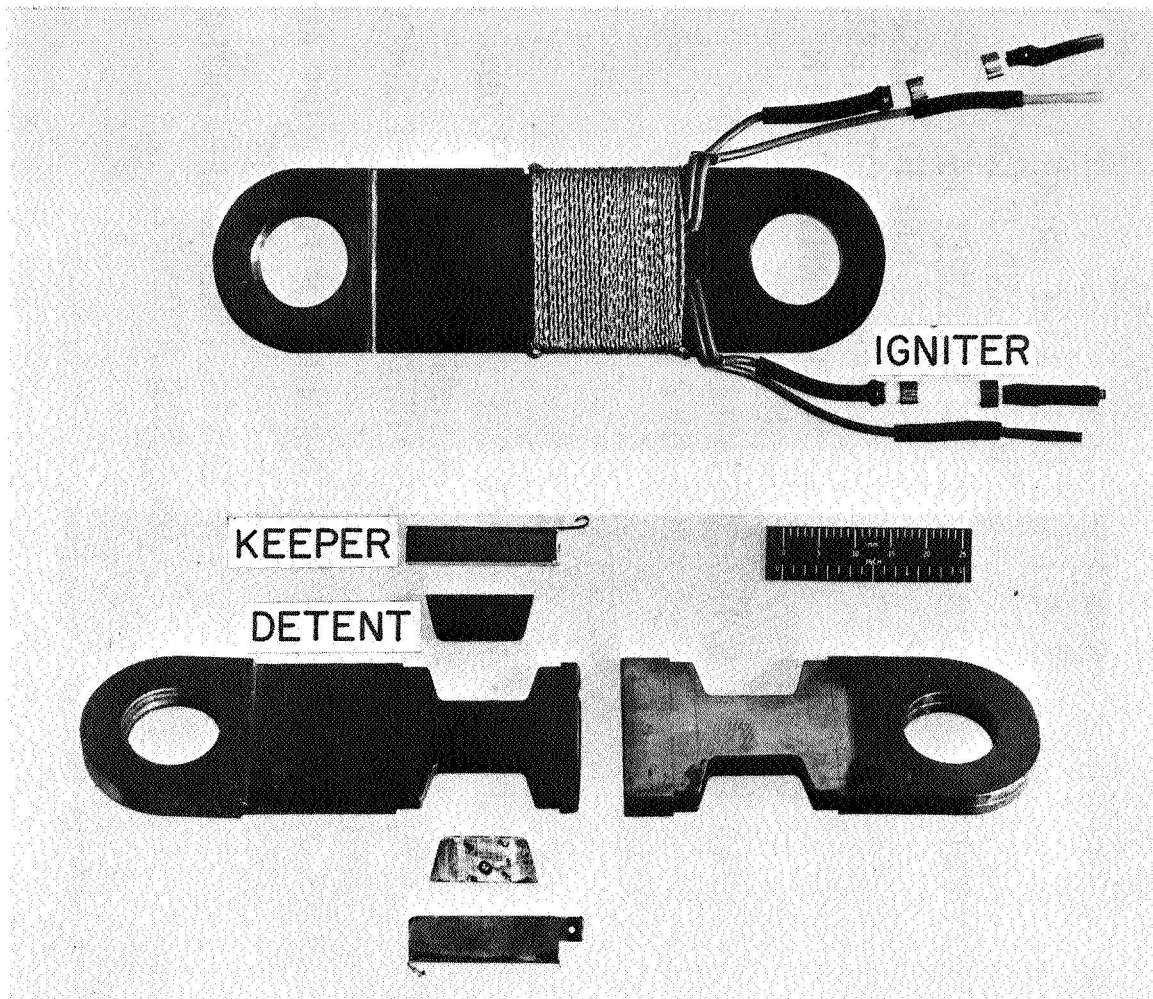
Photographs of assembled heat-shield ejection link and parts.
